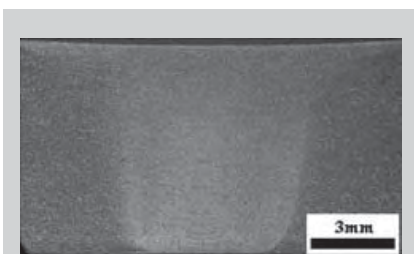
Cross section of the weld joint under optimum FSW conditions.^{2,3}
